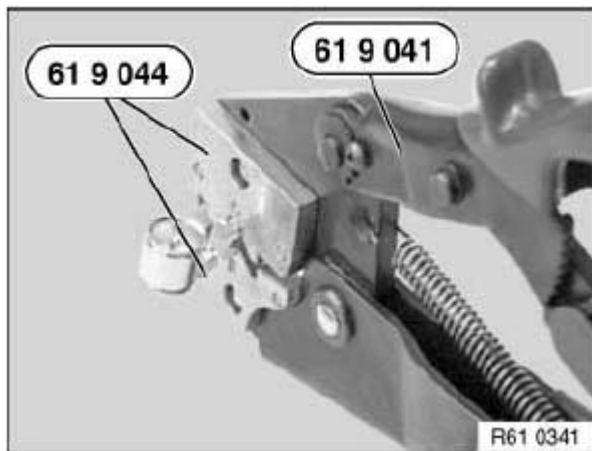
Identifying Hand Crimping Tool (61 9 041) And Matrix (61 9 044)
